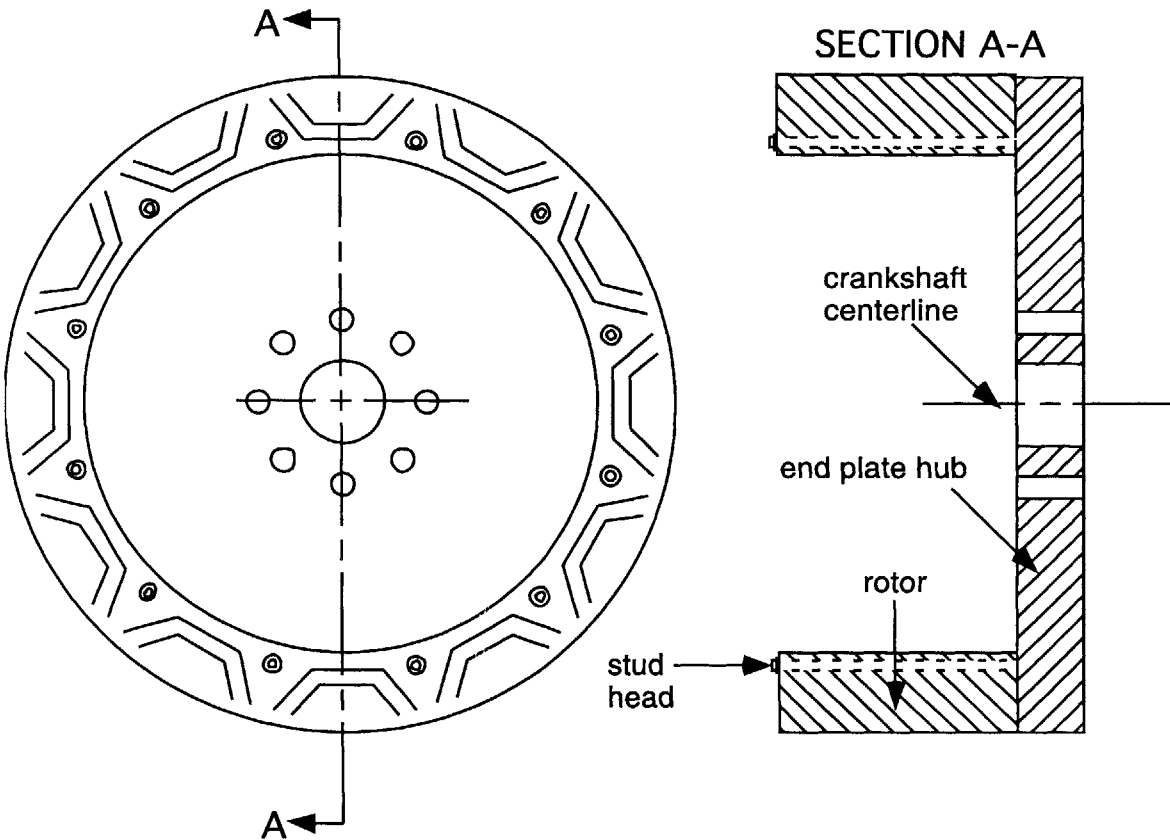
Rotor hub design using axial bolts through the stack to an end plate.
